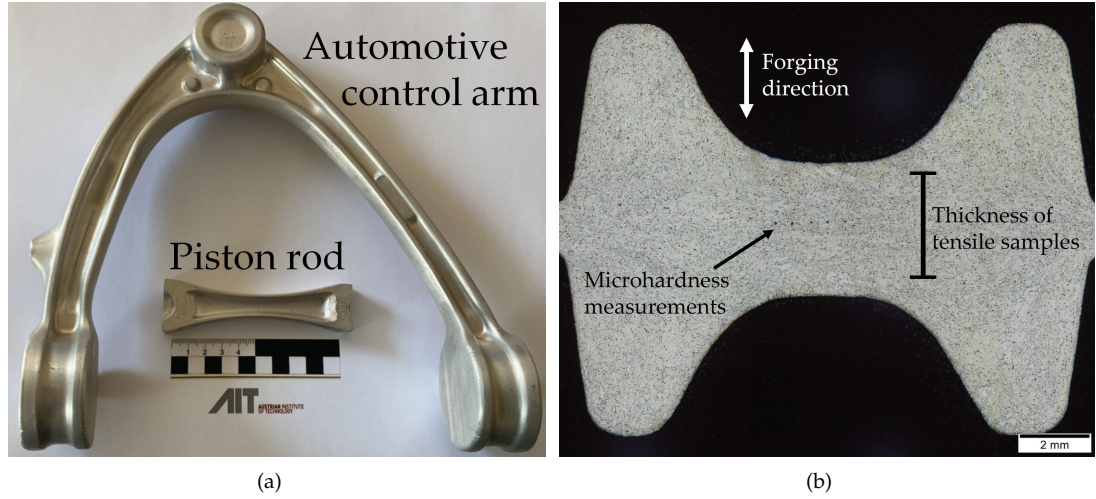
Showing (a) Mg parts produced in laboratory (piston rod) and industrial sized forging (automotive control arm), (b) cross section of a piston rod (in T6-temper) and measurement positions.
